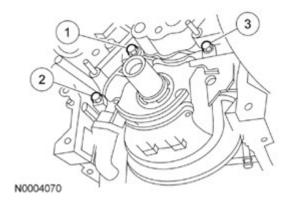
Identifying Tightening Sequence Of Oil Pump Bolts Courtesy of FORD MOTOR CO.
